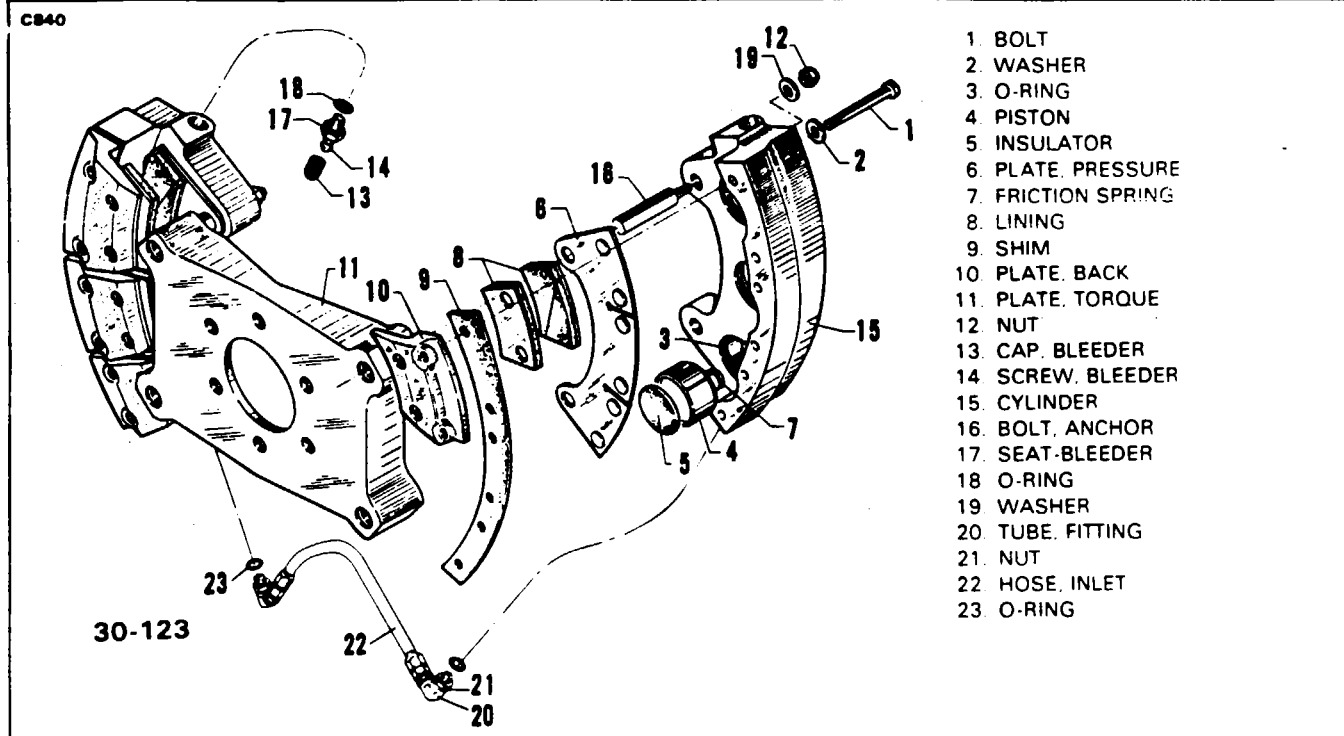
Wheel Brake Assembly (Cleveland 30-95A and 30-123)
